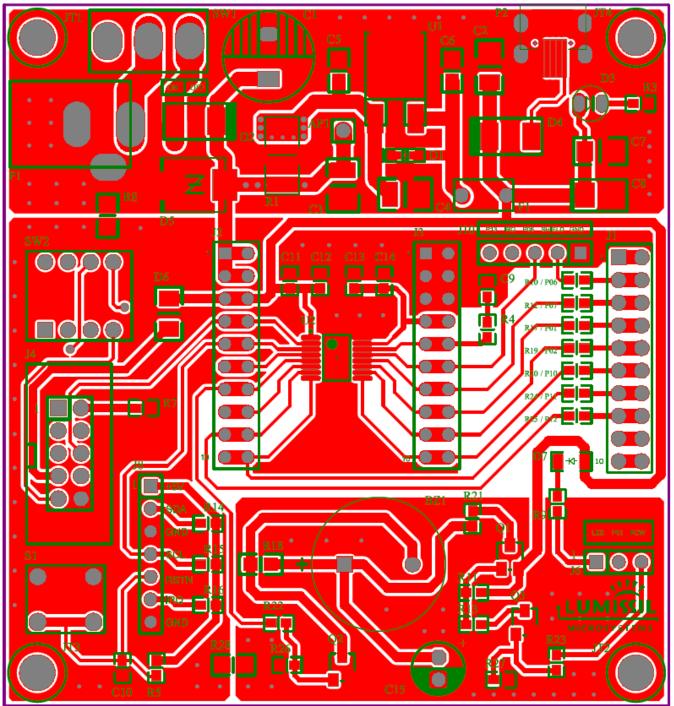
IS31CS8975 Evaluation Board PCB Layout - Top Layer
